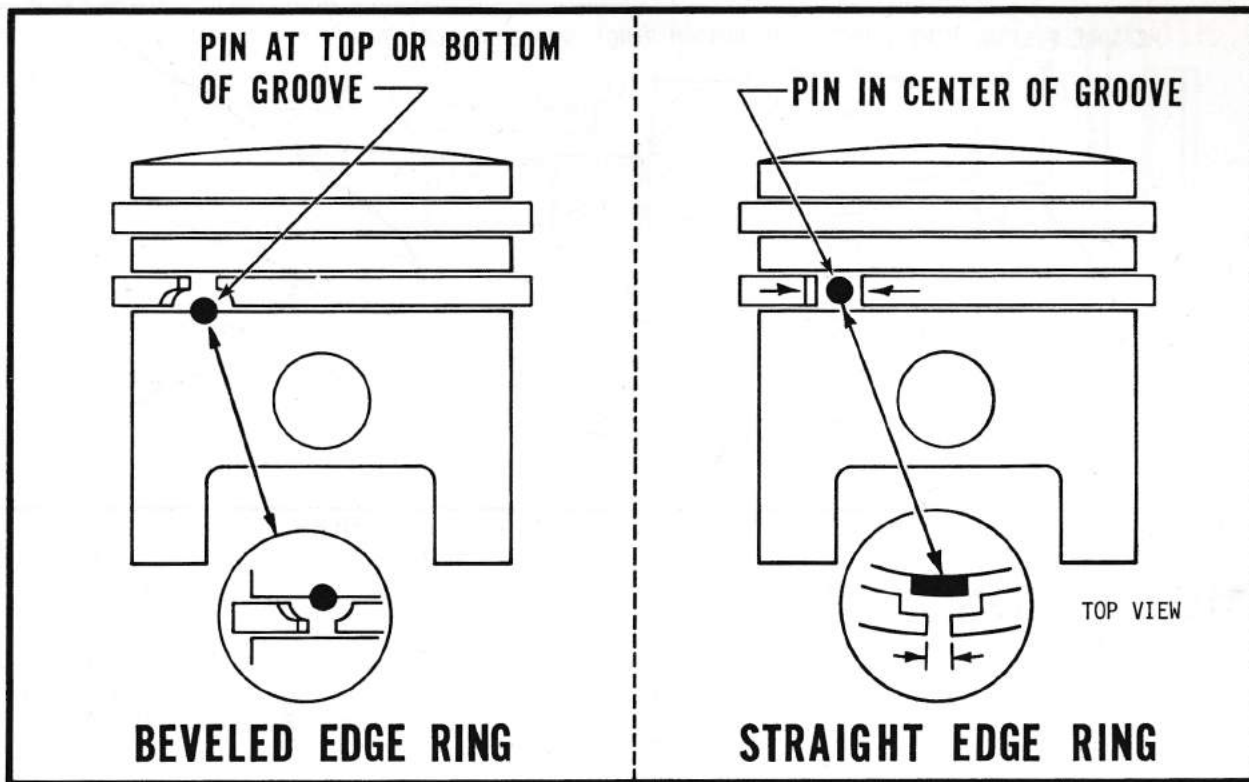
PISTON PIN LOCATION AND RING DIFFERENCE
